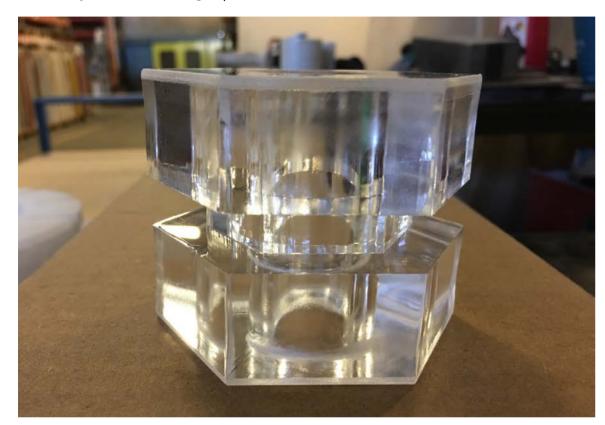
The designers had wanted a "thicker" bead, to be 3"-4" in height, I explained that material at that thickness in a sheet good was not available and would not cut on the machine. So gluing was the only option for creating a sample to fit their specifications. I created the visual aid to inform my CAD team to create the cut files + for fabrication to make what the specifier was seeking.
